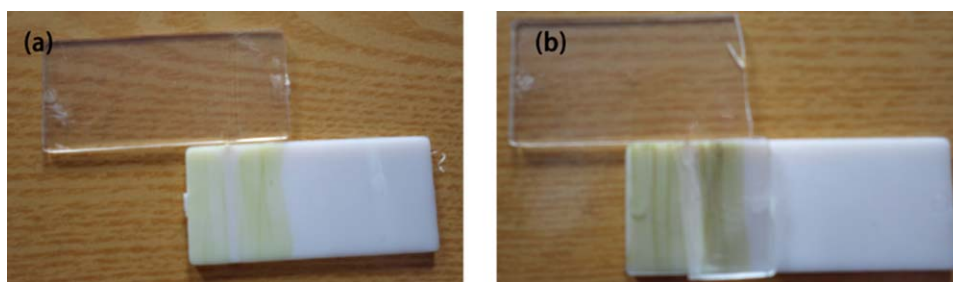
The broken welding specimens: (a) PMMA/PBT and (b) PMMA/PC/PBT. [Color figure can be viewed in the online issue, which is available at wileyonlinelibrary.com.]
